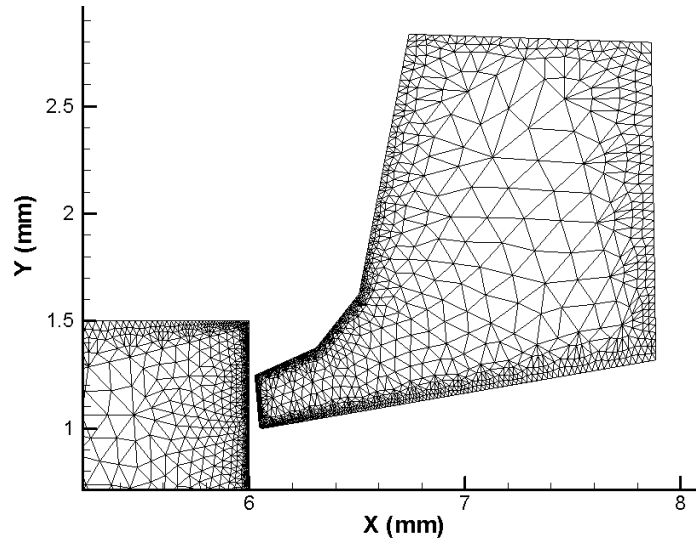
Modified tool geometry of reduced contact length between the tool and the chip
